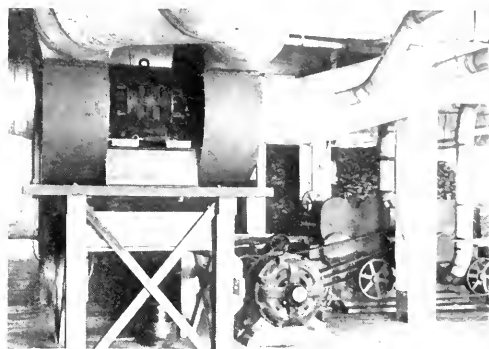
A 35 HP, 1100 R.P.M. SQUIRREL-CAGE MOTOR WITH DOUBLE EXTENDED SHAFT, DRIVING DOUBLE EXHAUST FAN.
